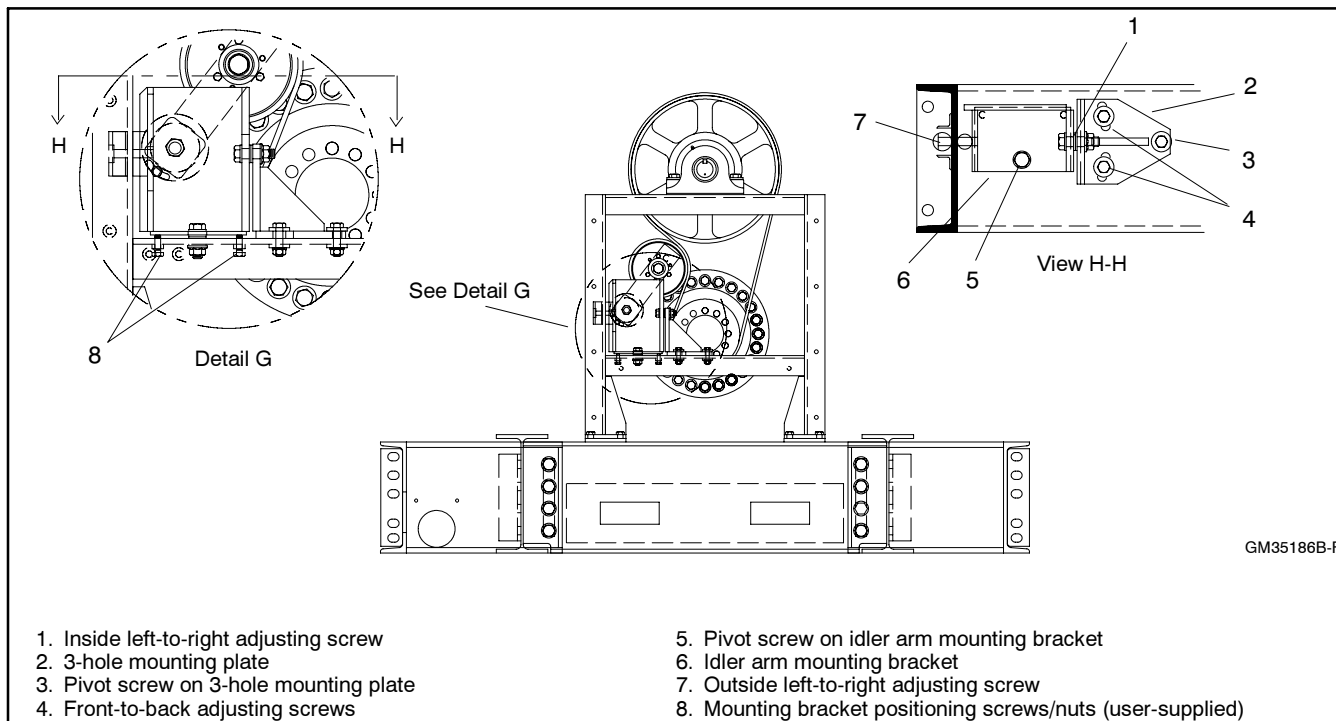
Idler Pulley Arm Bracket and Plate Adjustment
